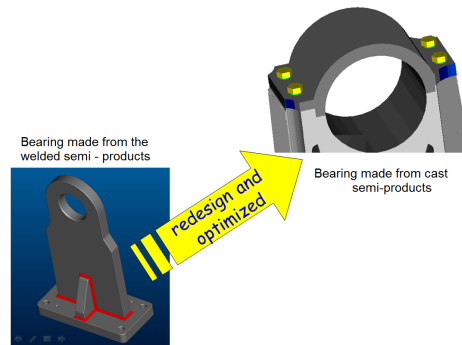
Bearing redesign and optimized from engineering viewpoint.
